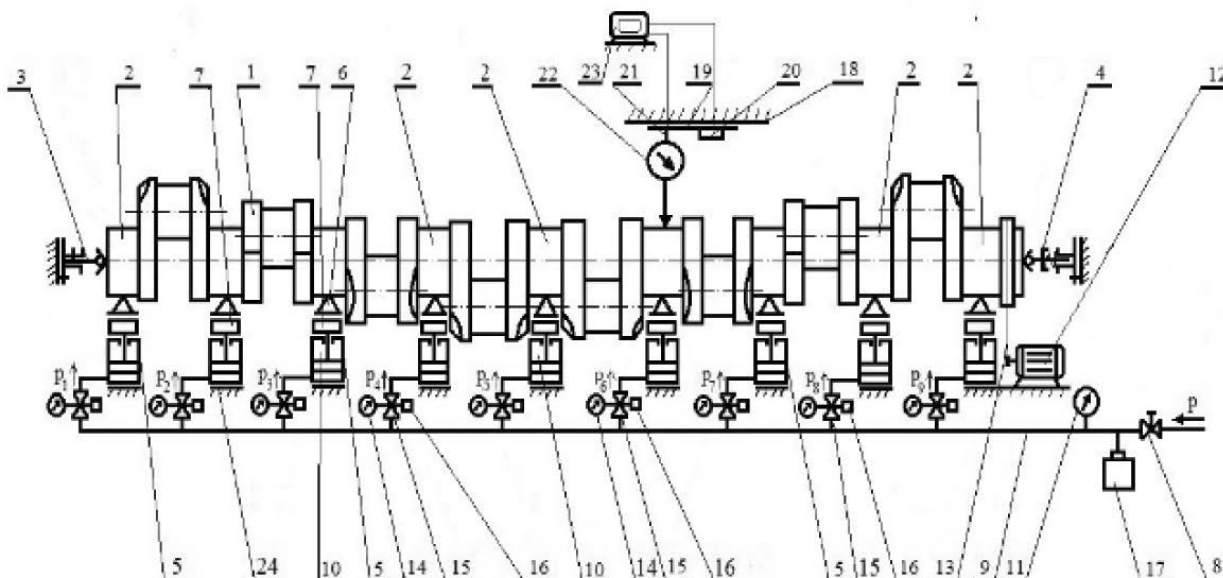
Main components of the measurement system; the crankshaft is locked in locking pins
